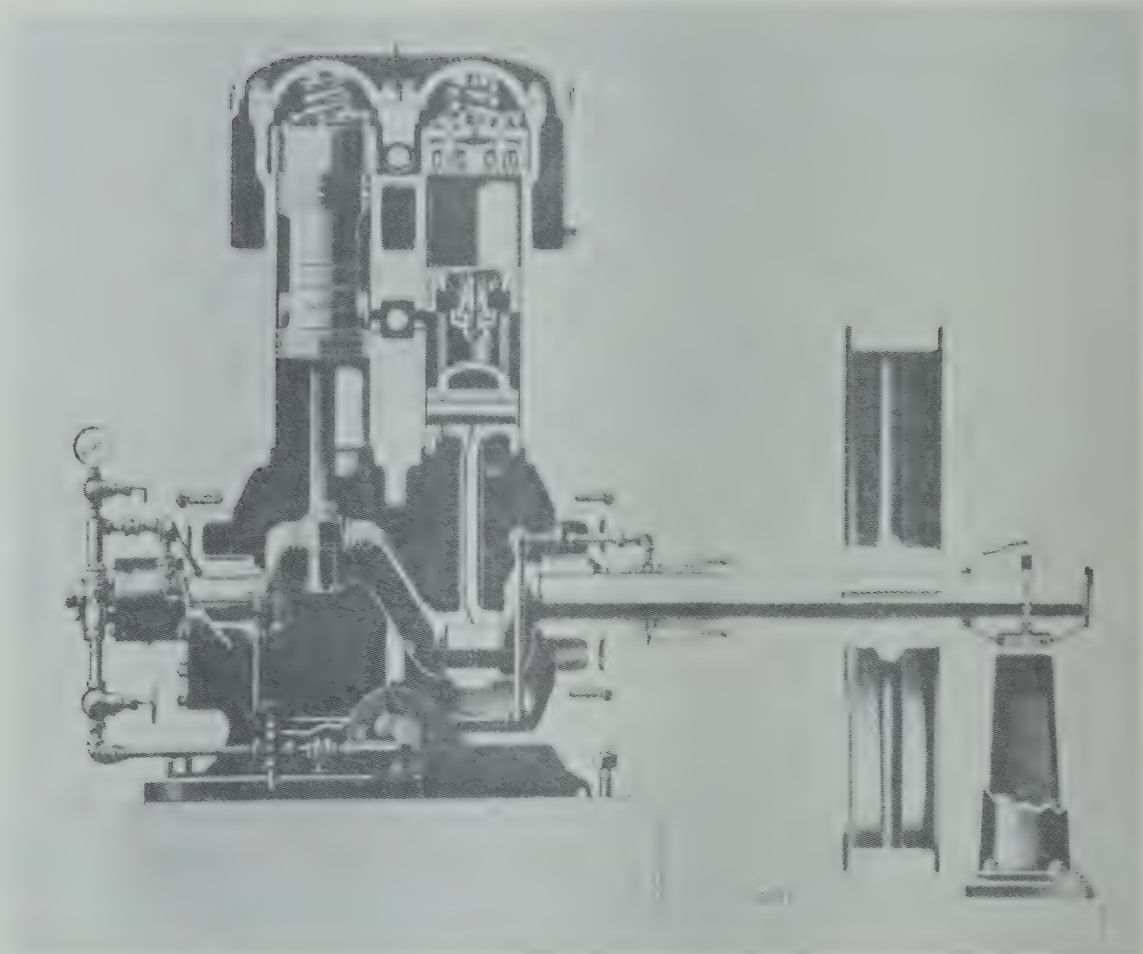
An ammonia, single-acting reciprocating compressor. In this compressor, the suction gas enters the cylinders through valves in the top of the pistons and is discharged through plate-type valves in the cylinder heads. (Photo courtesy of Frick Company)
